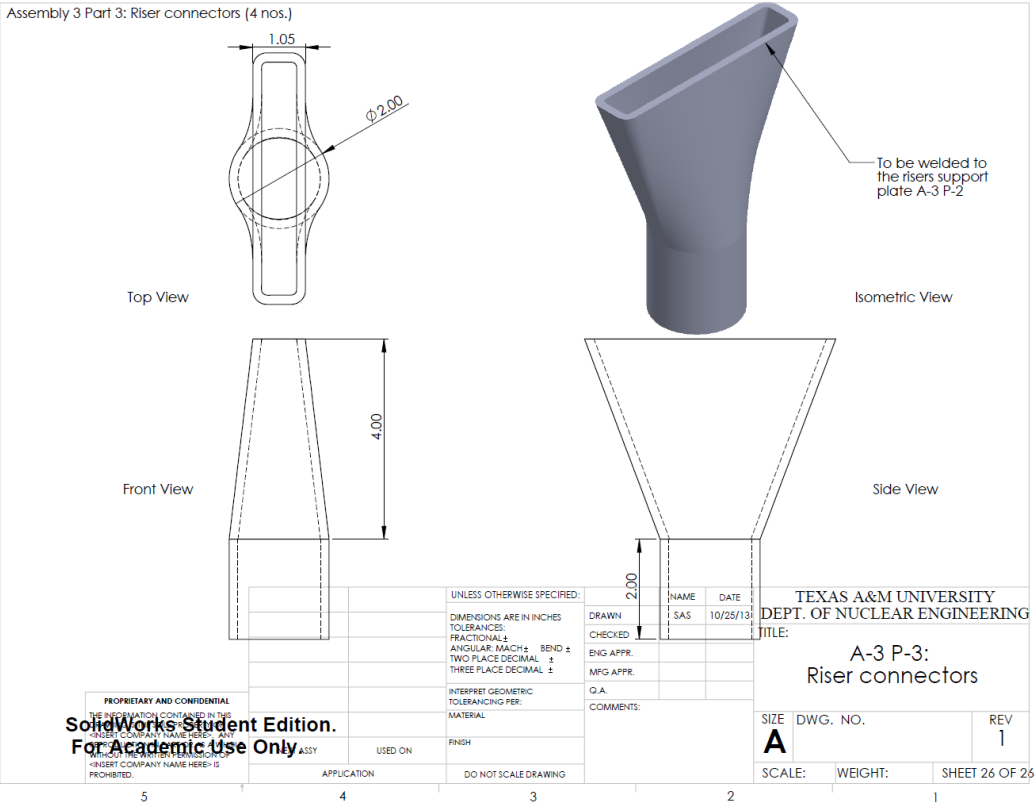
Risers with support plates assembly: Risers connector (4 units) (A-3 P-3).
